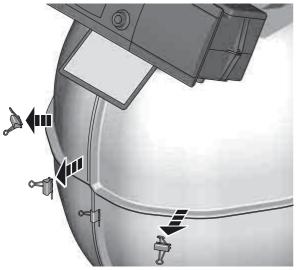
Remove the holding clamps on the heat insulation layers
